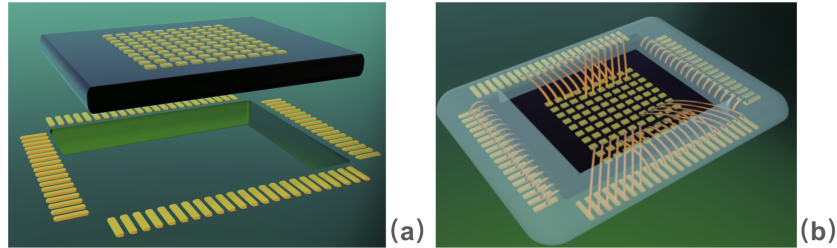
(a) Z-axis PCB milling (b) UV-cured epoxy encapsulation.
